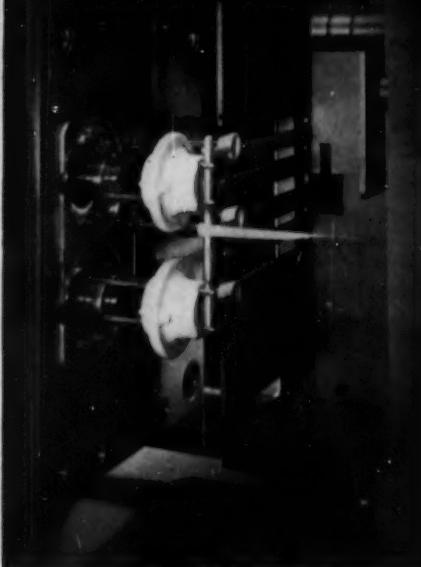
Operator removes finished closures from delivery chute. On machine, printed blanks are being dropped into position for forming. (Photo, Dixie Cup)
